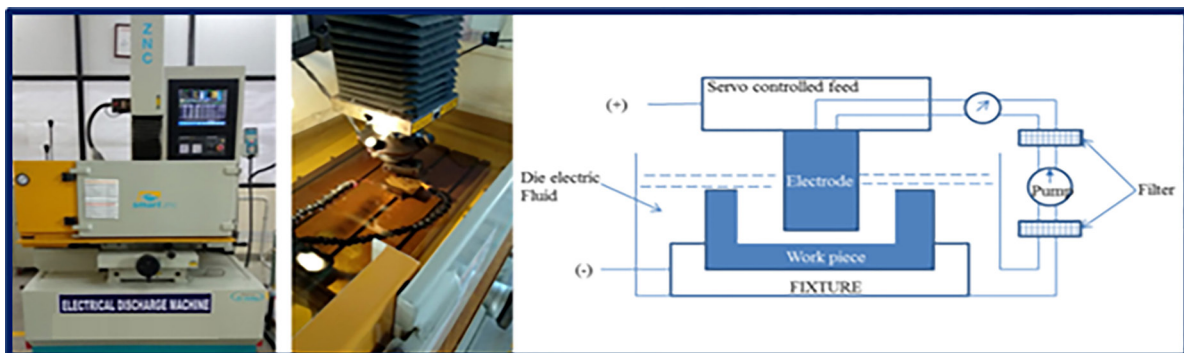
(A) Die sinking EDM machine (B) Machining of Inconel 800 (C) Schematic diagram of working of EDM machine.
